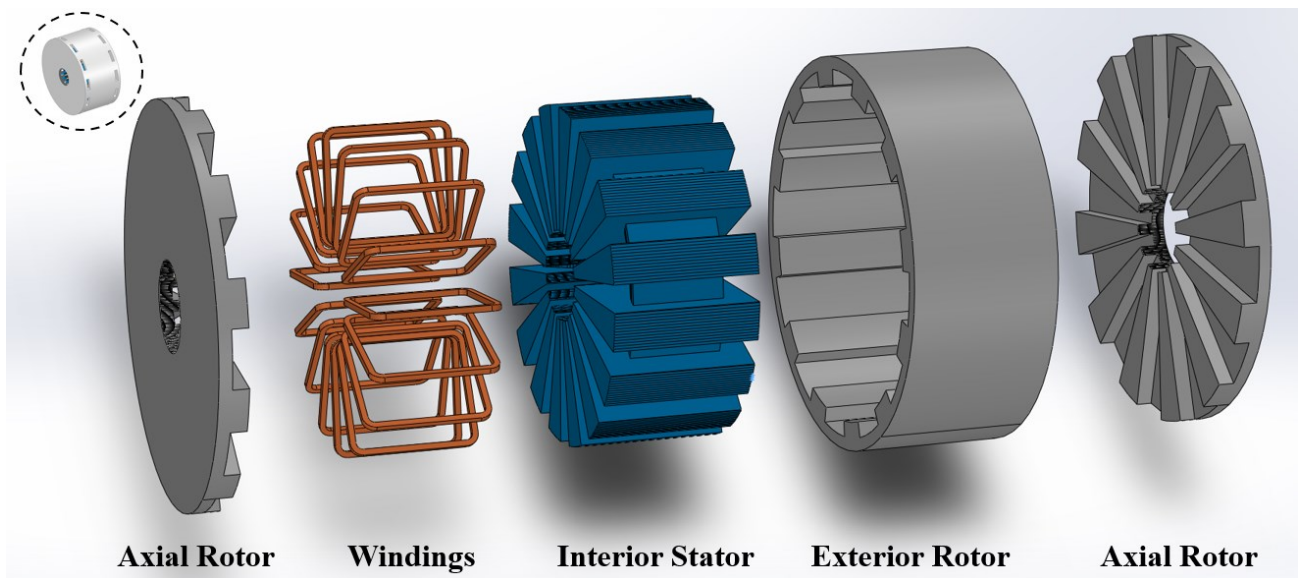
The exploded view of the 16/12 salient pole structure.
